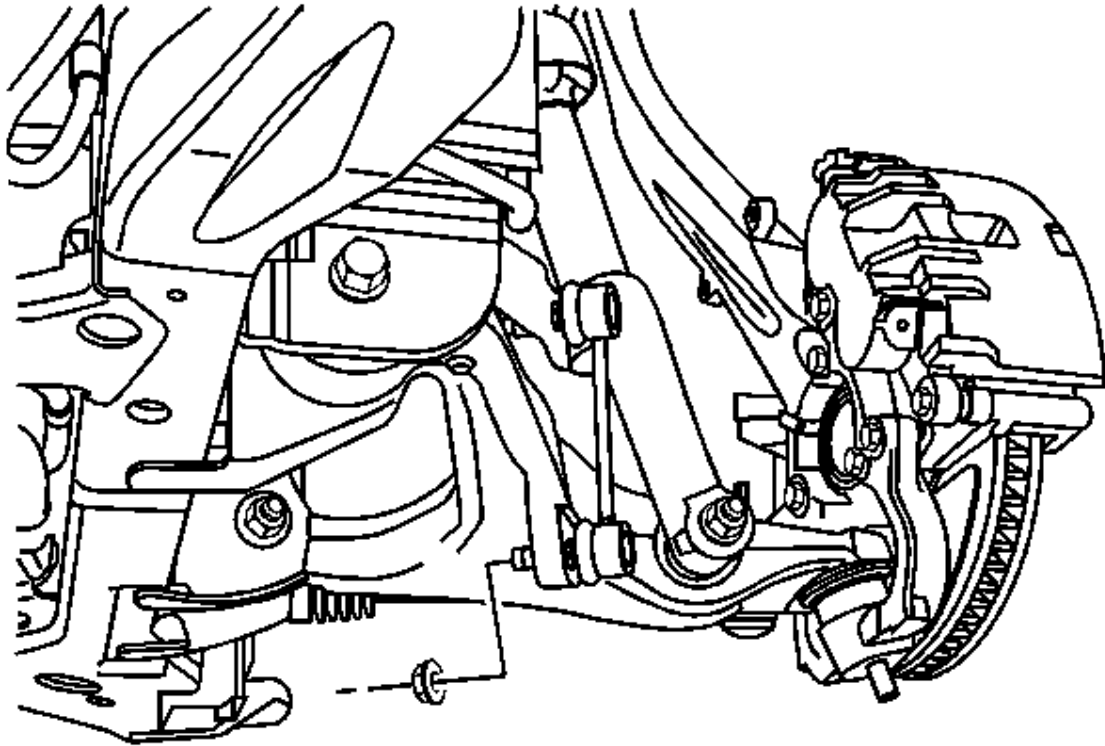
View Of Stabilizer Shaft Link Lower Retaining Nut
